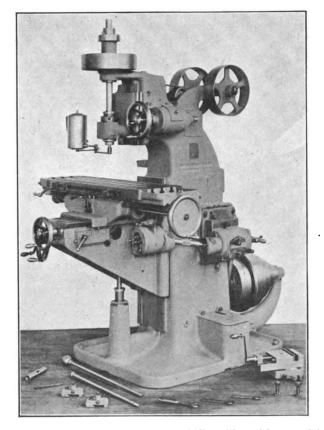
Brown & Sharpe vertical spindle miller with cone drive.
